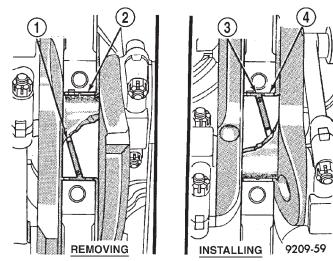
Upper Main Bearing Removal and Installation with Tool C-3059
